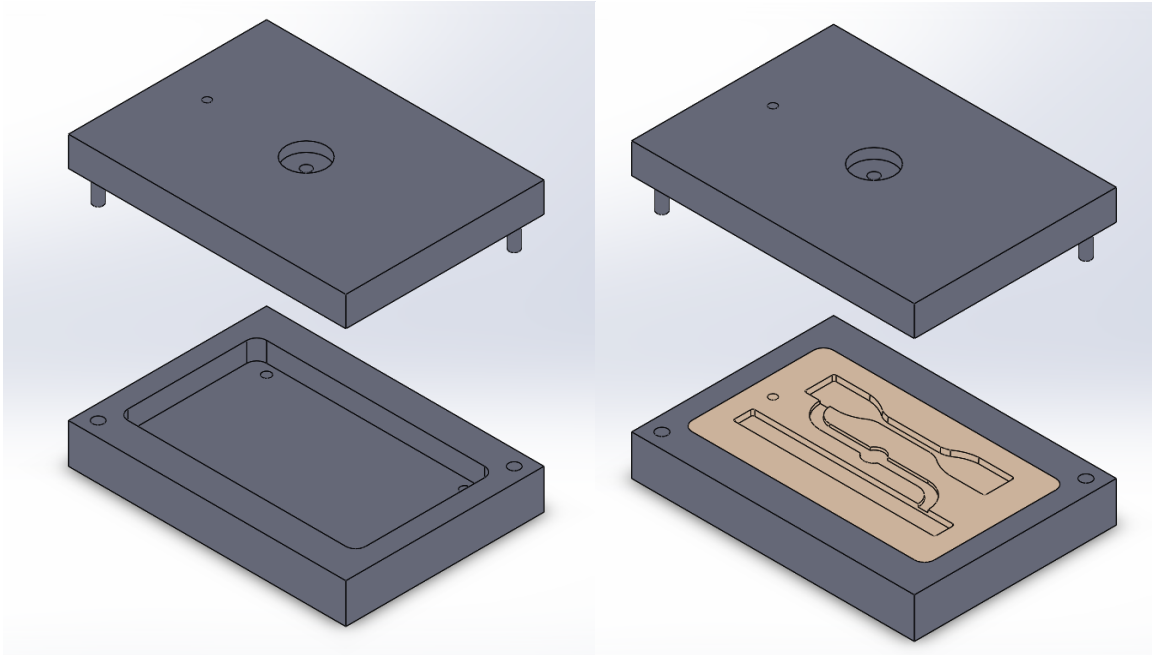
Aluminum mold enclosure Solidworks™ rendering: without insert (left) and with insert (right)
